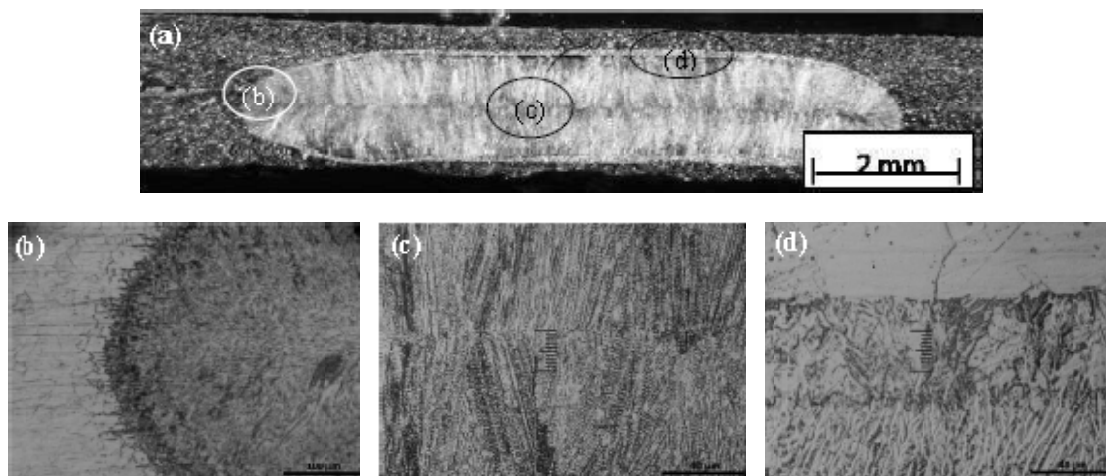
Weld profile of 1.0-1.0 mm thick joints: (a) macrograph (b) nugget corner (c) nugget (d) interface
